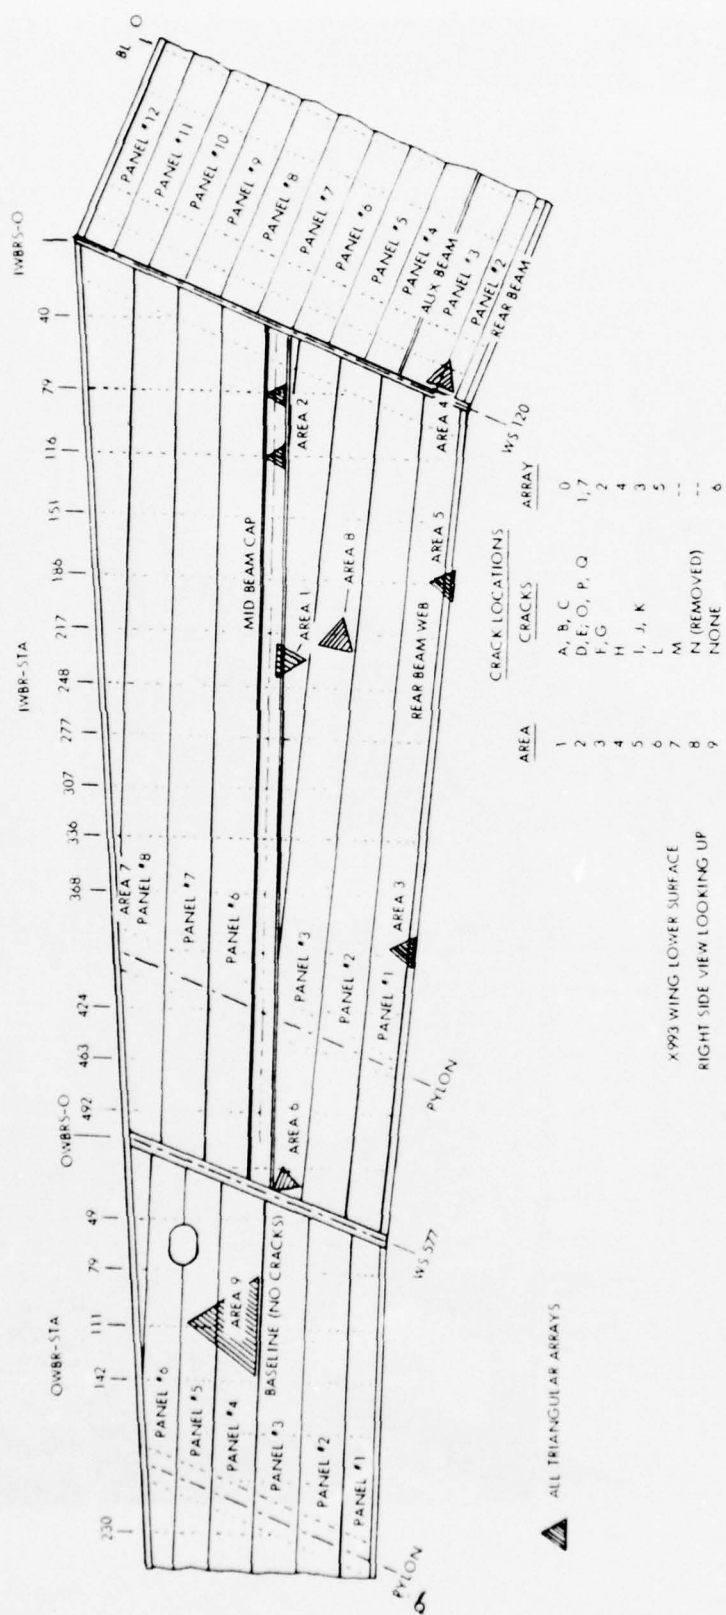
VIEW OF X993 RIGHT WING INNER WING BOX, REAR BEAM
